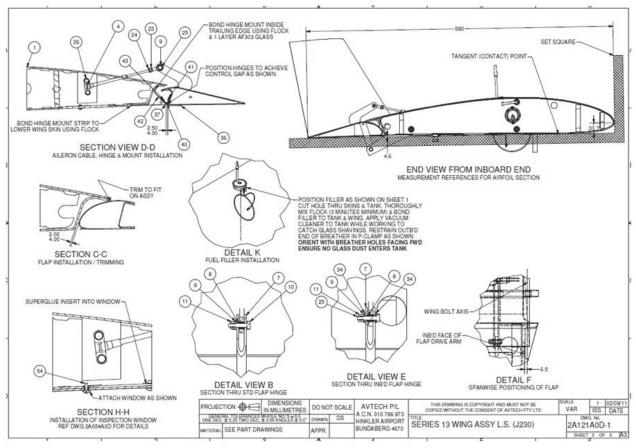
J230 Wing Assembly Sheet 3, Ser 13 (J230/J430)
